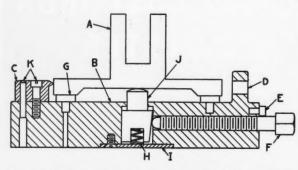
Design of Milling Fixture Using Jack Pin to Support Light Part-Structure
